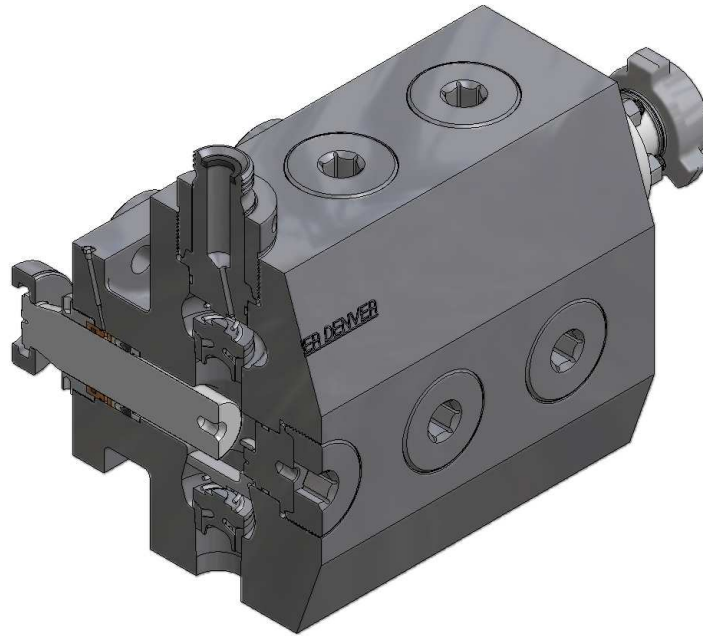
SUPER GWS FLUID CYLINDER SECTIONED ISO VIEW
